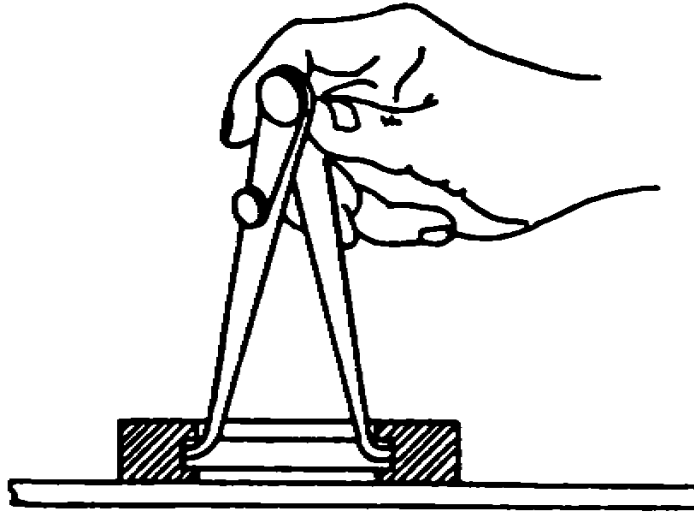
USING A TRANSFER CALIPER TO MEASURE A RECESSED DIAMETER
